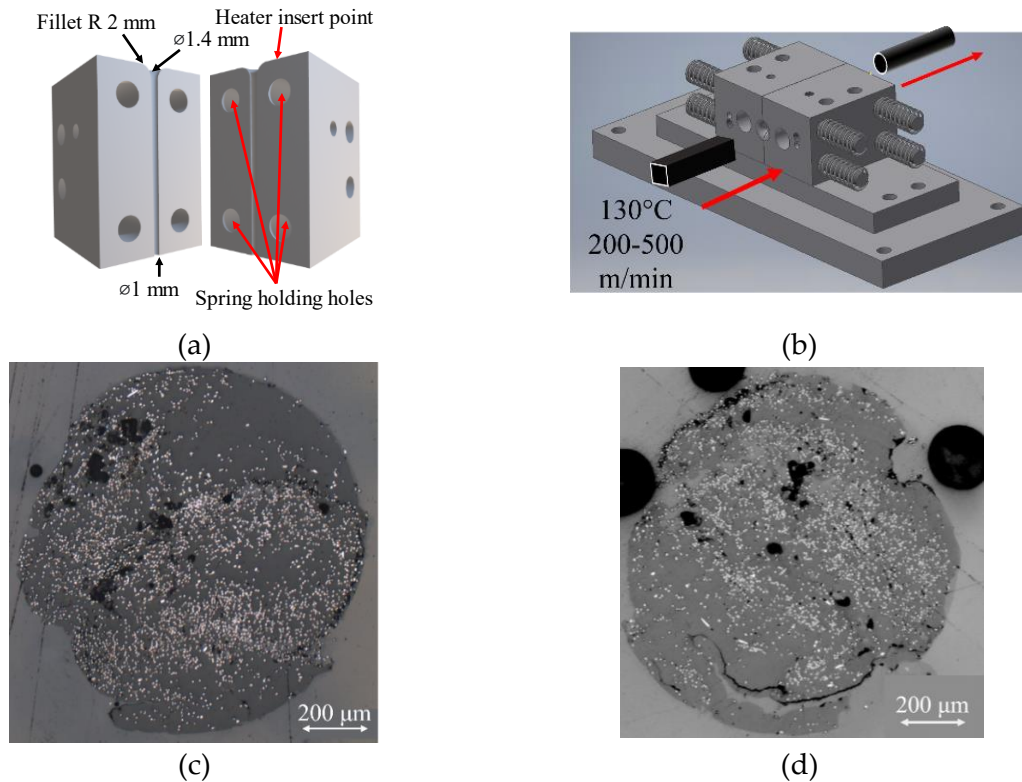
(a) - (b) A schematic of a two-side assembly convergent nozzle before and after assembly; (c) - (d) circular filament after passing through the two-side convergent nozzle.
